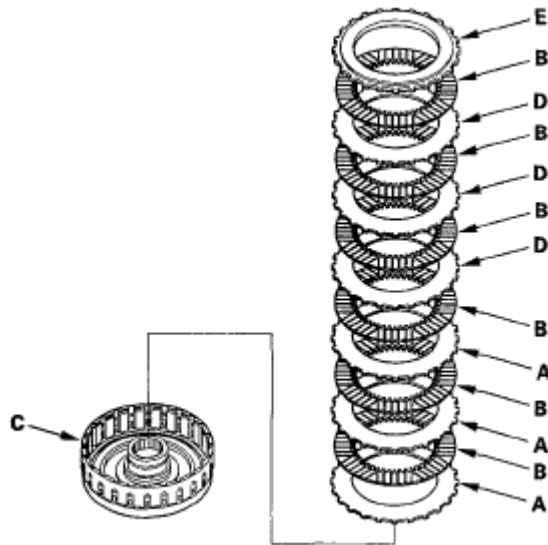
Identifying Flat-Plates, Discs, 3rd Clutch Drum And Wave-Plates
